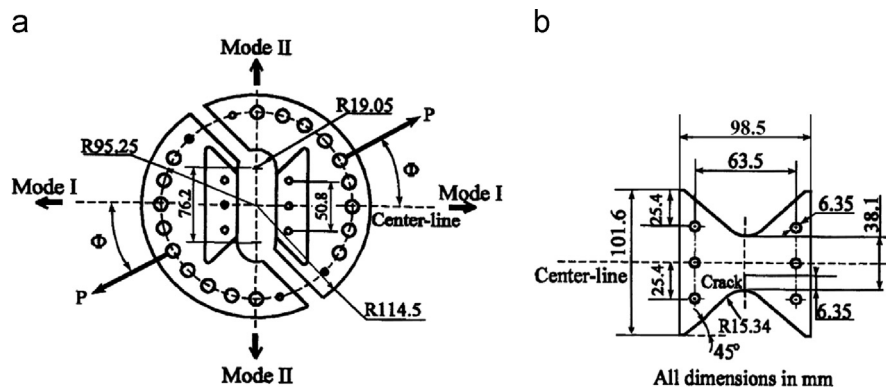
In-plane dimensions of (a) the Arcan test fixture and (b) the Arcan test specimen [23].
